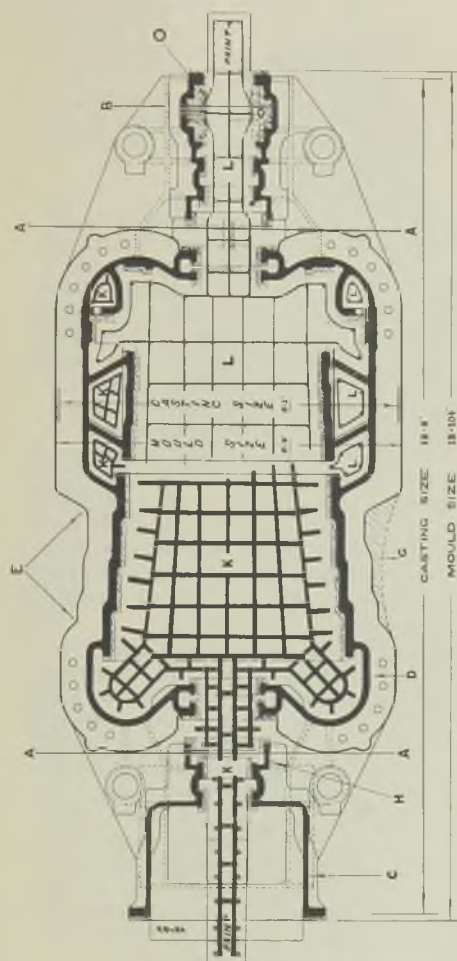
RELATIVE MOULD AND CASTING SIZE FOR
